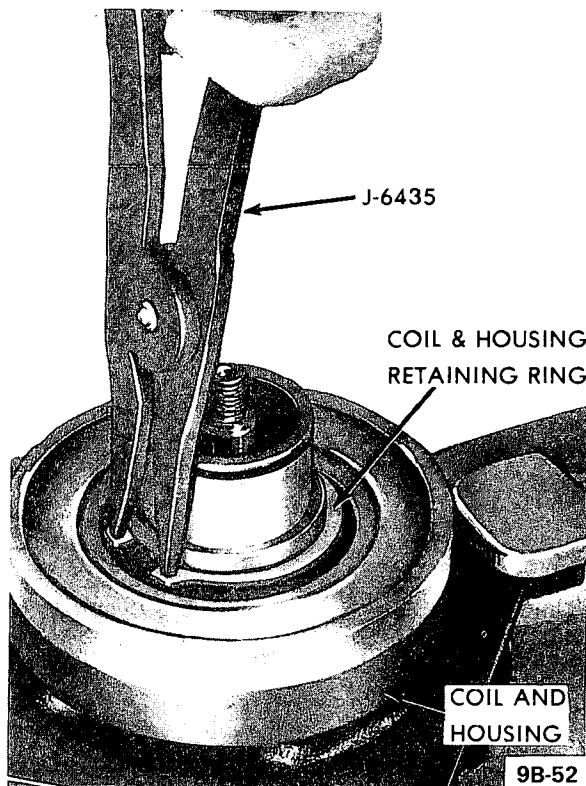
B-76 Removing or Installing Coil and Housing Retainer Ring - 6 Cylinder Compressor
